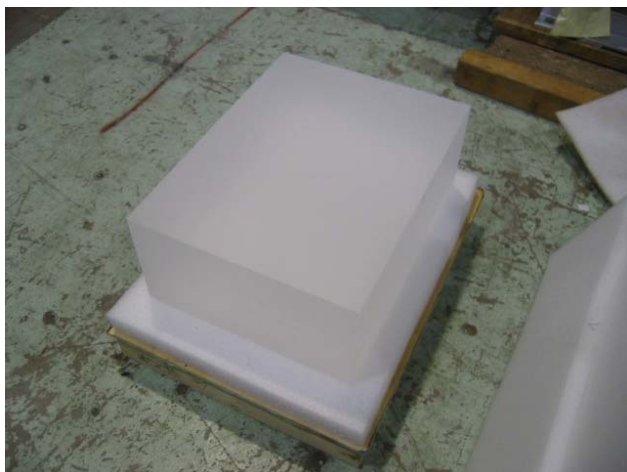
The fused silica 7980 material in a form of block ready for machining.
